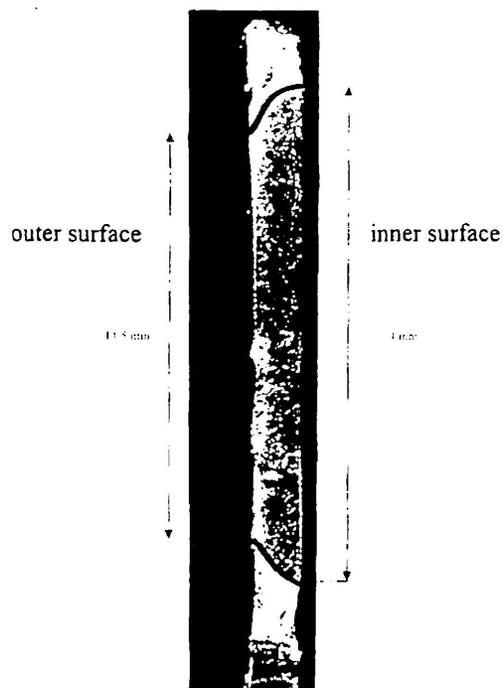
Cracking in the rolled area in the tubesheet. Laser profilometry of a silastic mold of a rolled tube with a drilling defect.
